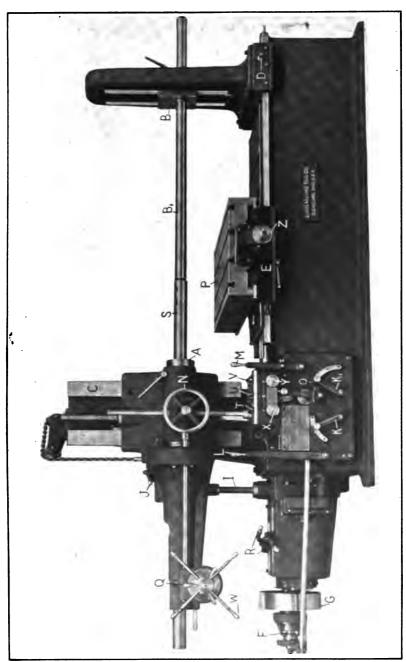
Lucas Horizontal Boring, Drilling and Milling Machins'
